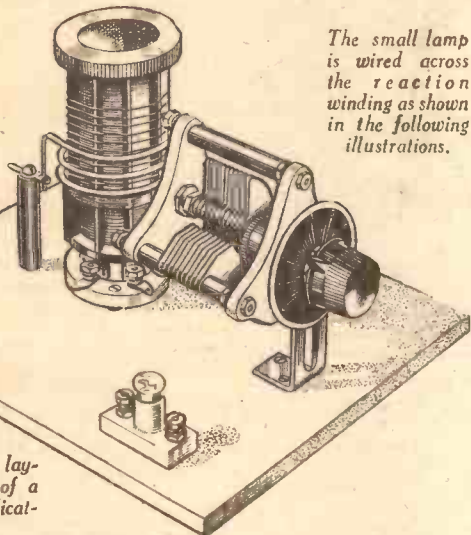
Showing the layout and construction of a simple A.A. with indicating lamp.
